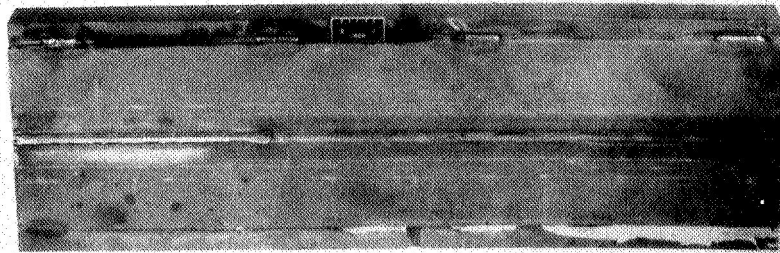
Experimental panel tack welded to a 1-in. (2.54 cm) thick plate prior to repair welding.
